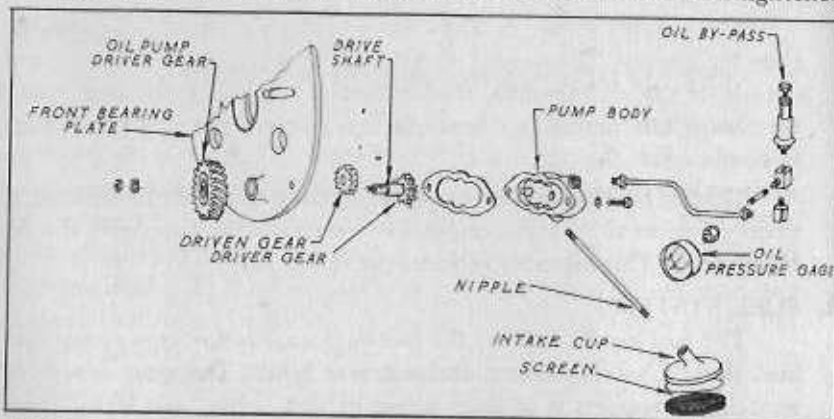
EXPLODED VIEW OF OIL PUMP ASSEMBLY
